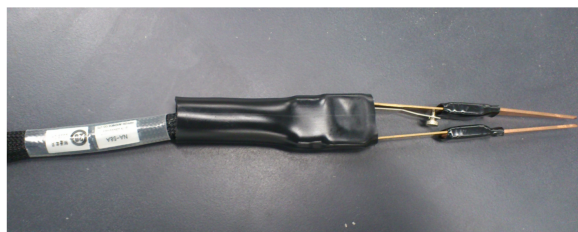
Handpiece for welding machine (NA-58, Avio inc., JP)
